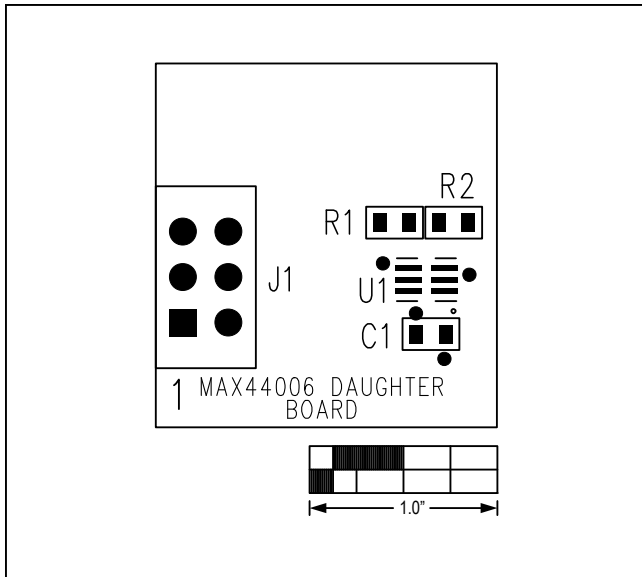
MAX44006 Daughter Board Component Placement Guide—Component Side
